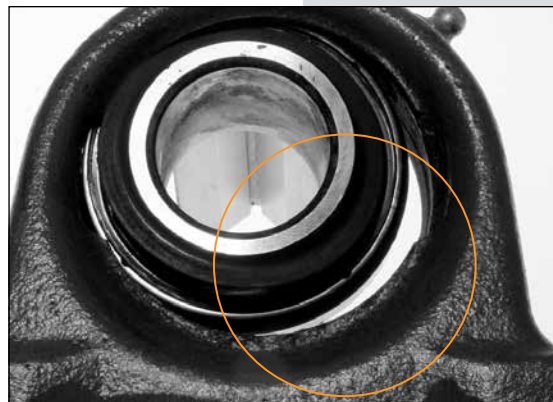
Exposure to abrasives and water in a severe environment caused extreme wear on this pillow block bearing.
